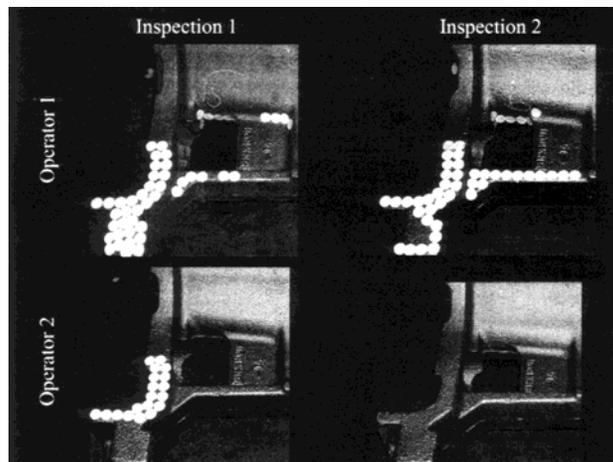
Pictures of defects marked on the same specified location on a second casting four different times. Same method used; two inspectors each inspected the same part twice.
